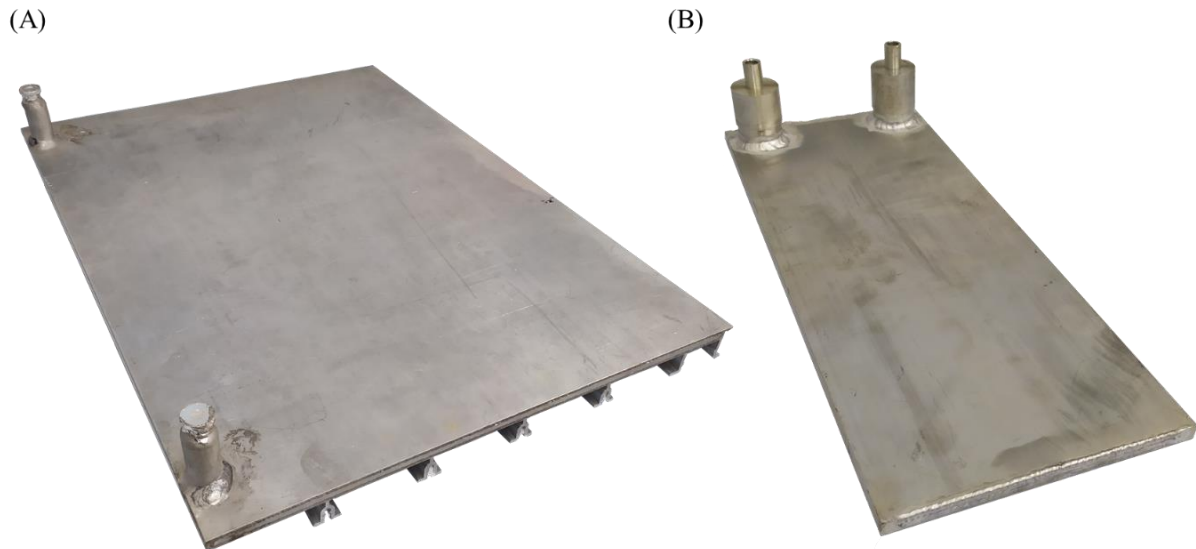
(A) Multi-channel flat heat pipe investigated and (B) its cooling manifold
